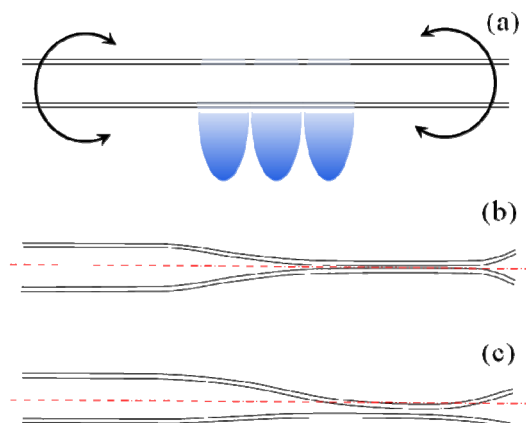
Hikinobashi and Jikudashi of a glass tube. (a) melt of the glass tube by a large blue flame, (b) the same axle (good), (c) disagreement of the axle.
